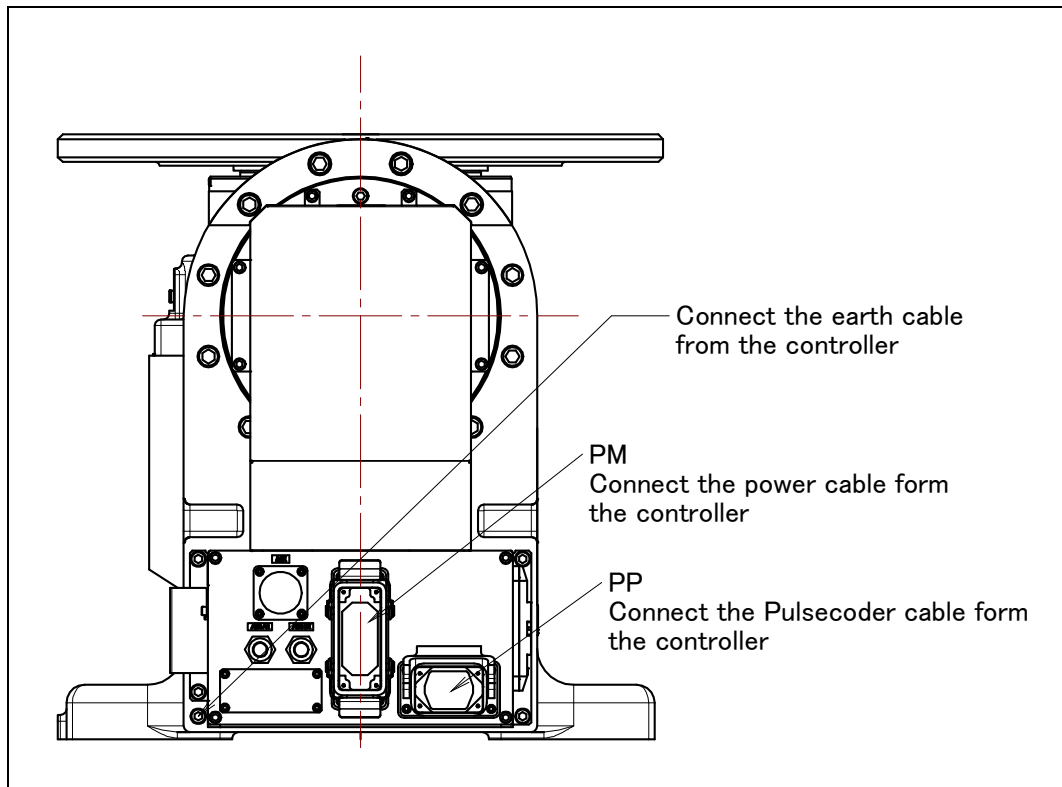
(a) Cable connection panel for the positioner mechanical unit
